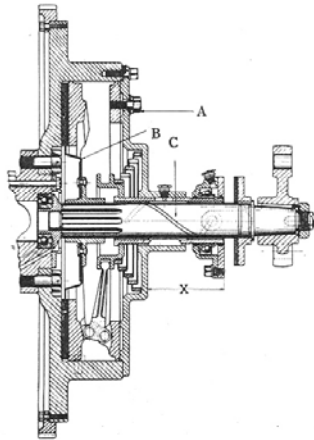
A sectional view of the single-plate clutch. A, set-screws for adjustment. B, clutch-plate. C, clutch-shaft.
